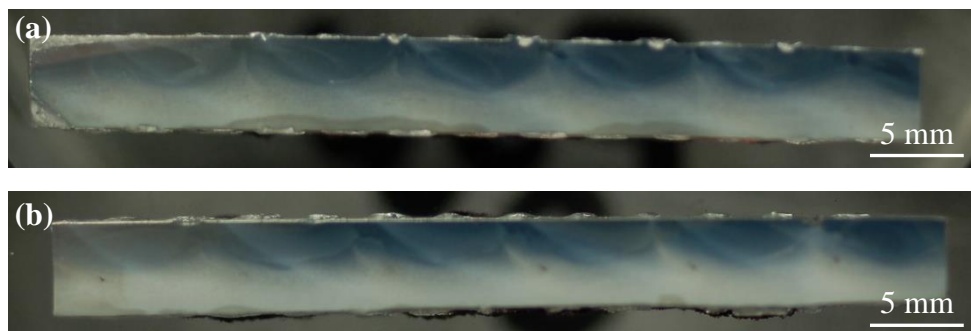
(a) Macro photo of cross-section of a friction stir lap welded Zn-22Al as-received alloy (b) macro photo of friction stir lap welded Zn-22Al with interlocked strands
